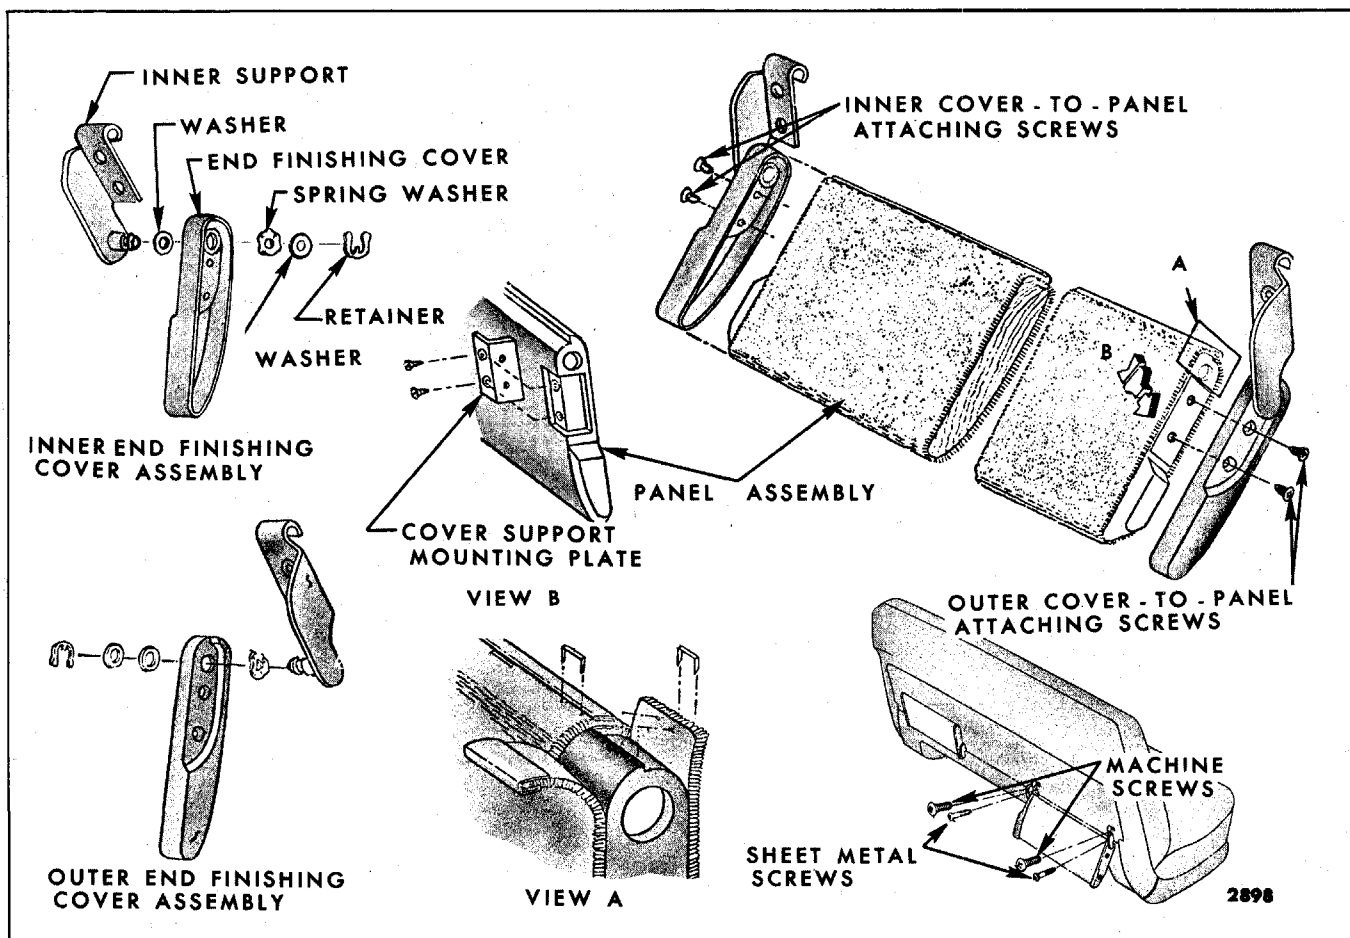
Footrest Assembly - Cadillac 6CB69 Styles
